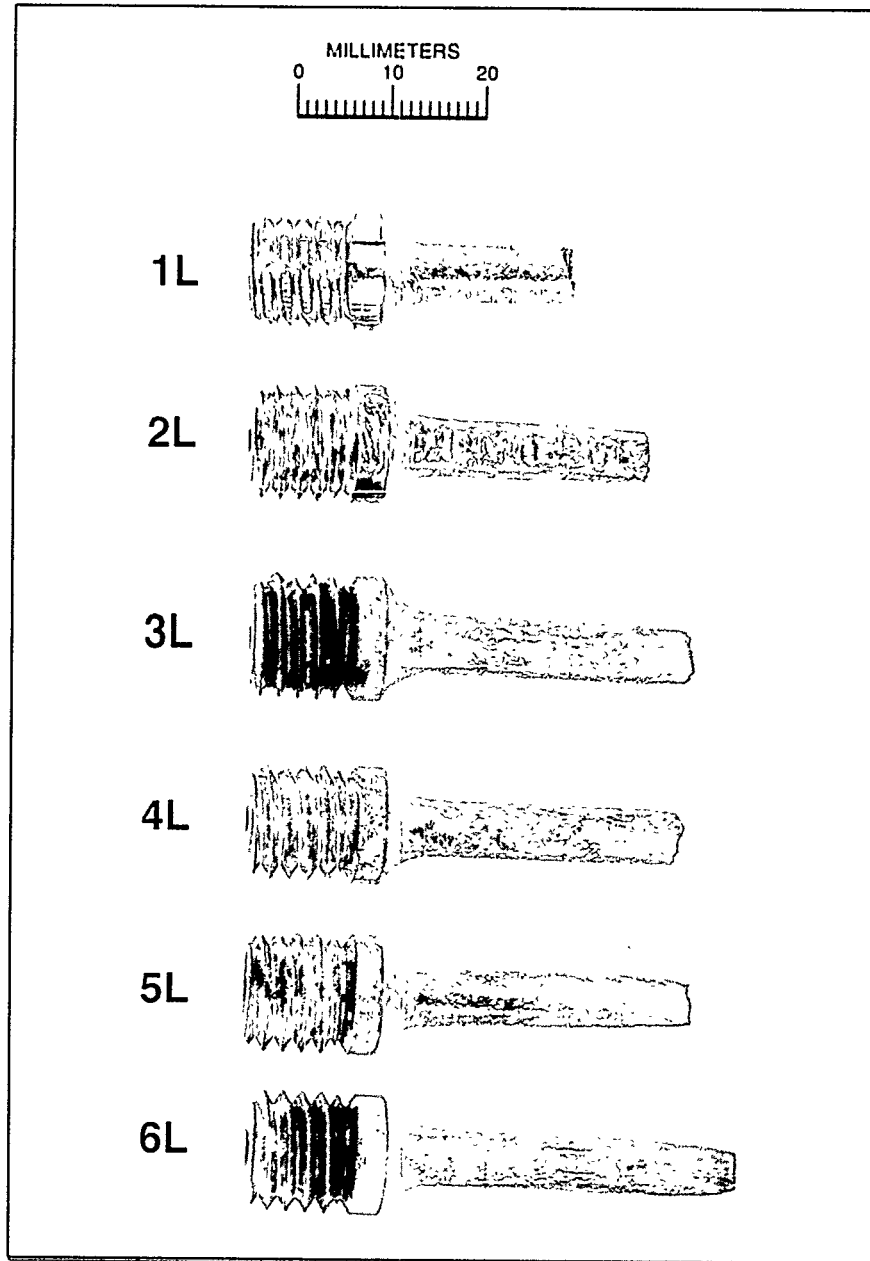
Weldment specimens from 25-mm (1-in.) -thick slab tensile tested at 25°C (1L), 100°C (2L), 200°C (3L), 400°C (4L), 600°C (5L), and 800°C (6L). Note that the failure, in all cases, is in the weld region.
